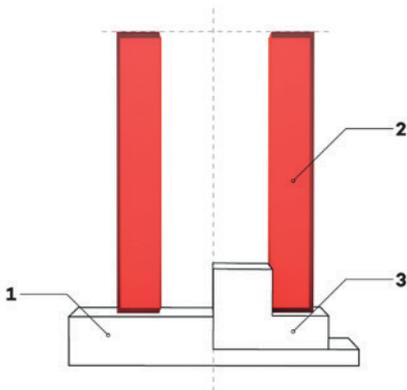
Heating in an upright position: support (1), PLEXIGLAS® tube (2), centering plug (3).
